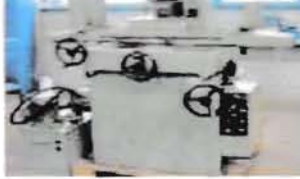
Surface grinding machine (www. thesurfacegrinder.com)
